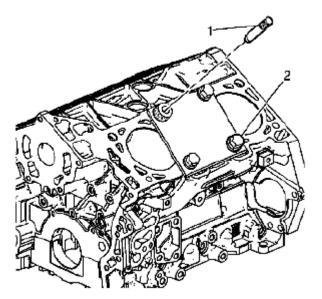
Positioning Fixture Plate With Bushing Installed Over Cylinder Head Bolt Hole Courtesy of SUZUKI OF AMERICA CORP.
